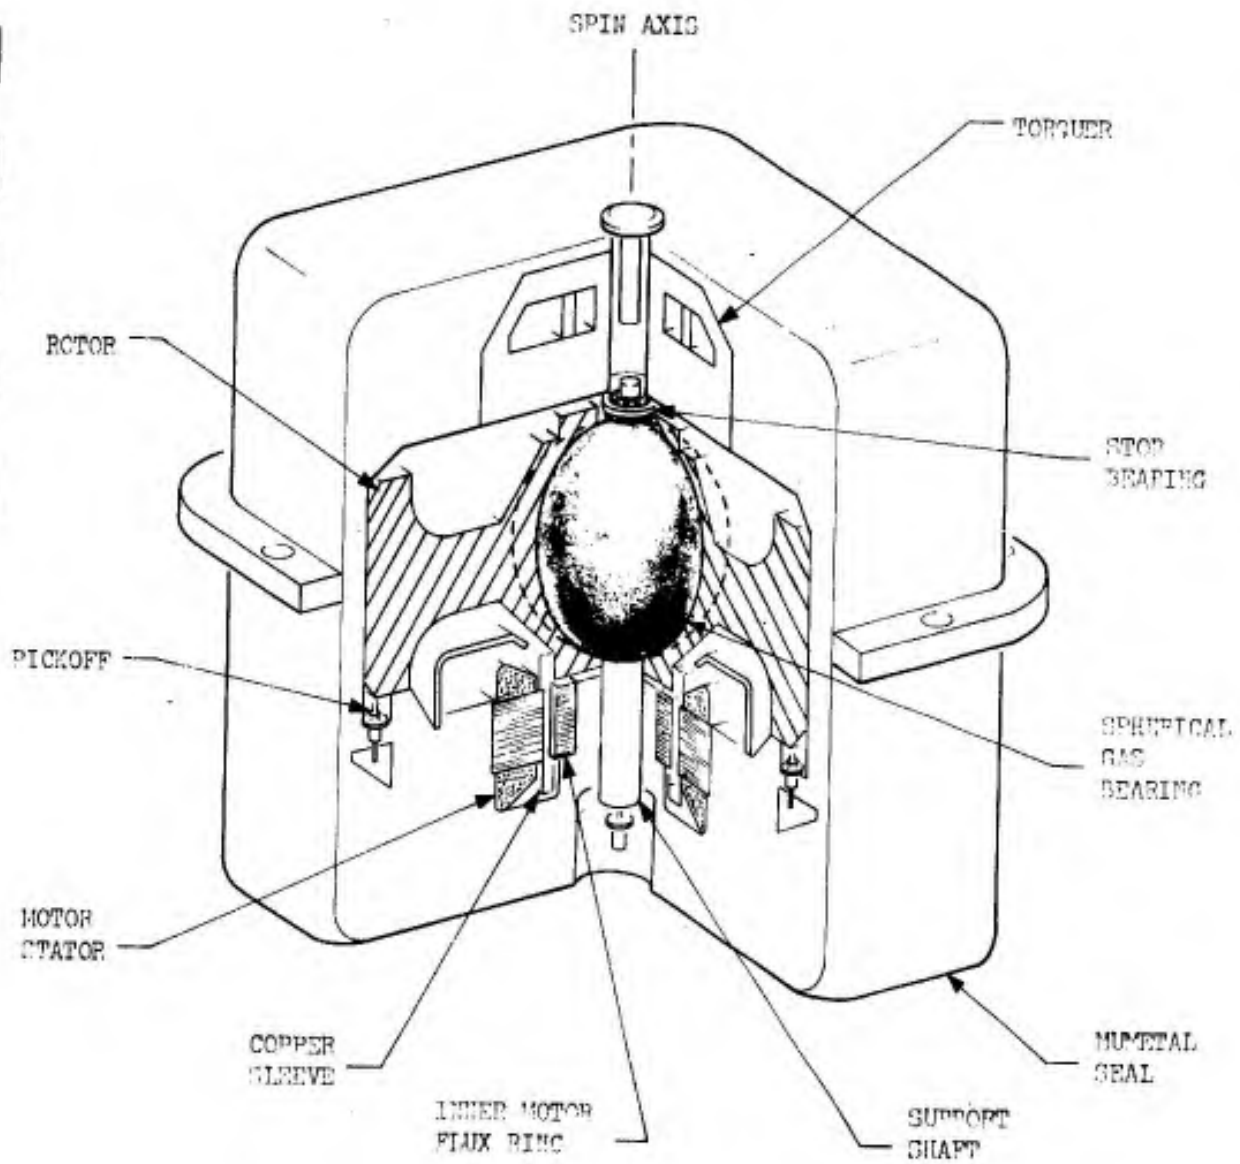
SIMPLIFIED DRAWING OF FREE-ROTOR GYRO
